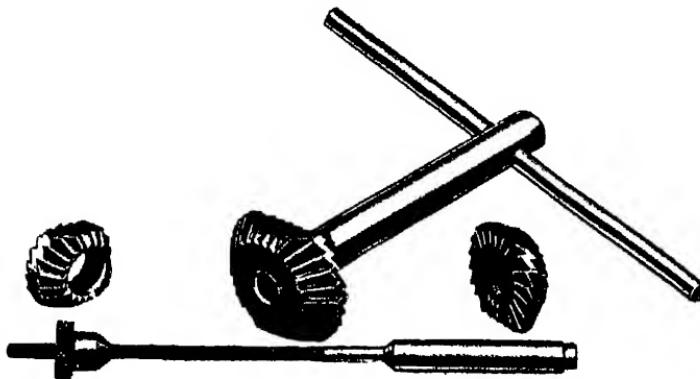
"UNIVERSAL" VALVE RESEATING TOOLS
